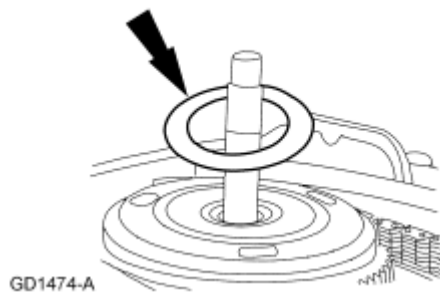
No. 10 Driven Sprocket Thrust Washer
